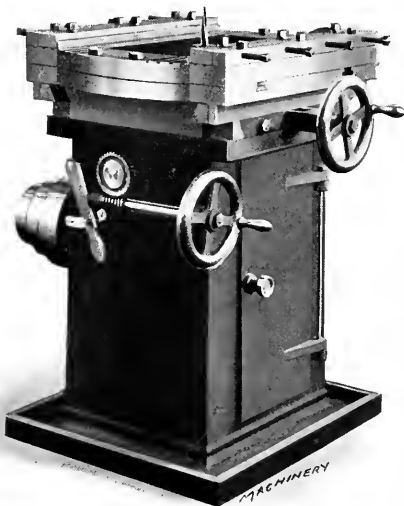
Harrington "Under" Type of Milling Machine for Die Work
